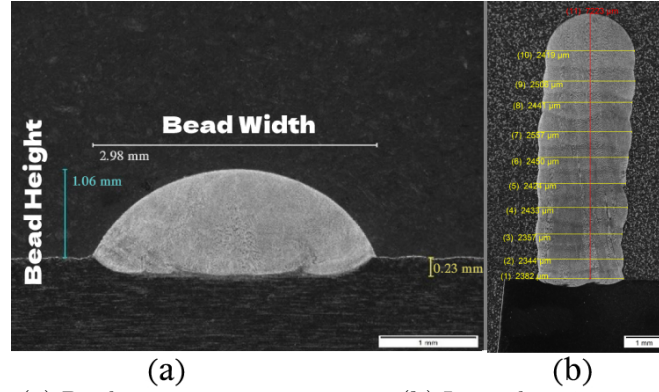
(a) Bead geometry measurements. (b) Layer deposition measurements.
